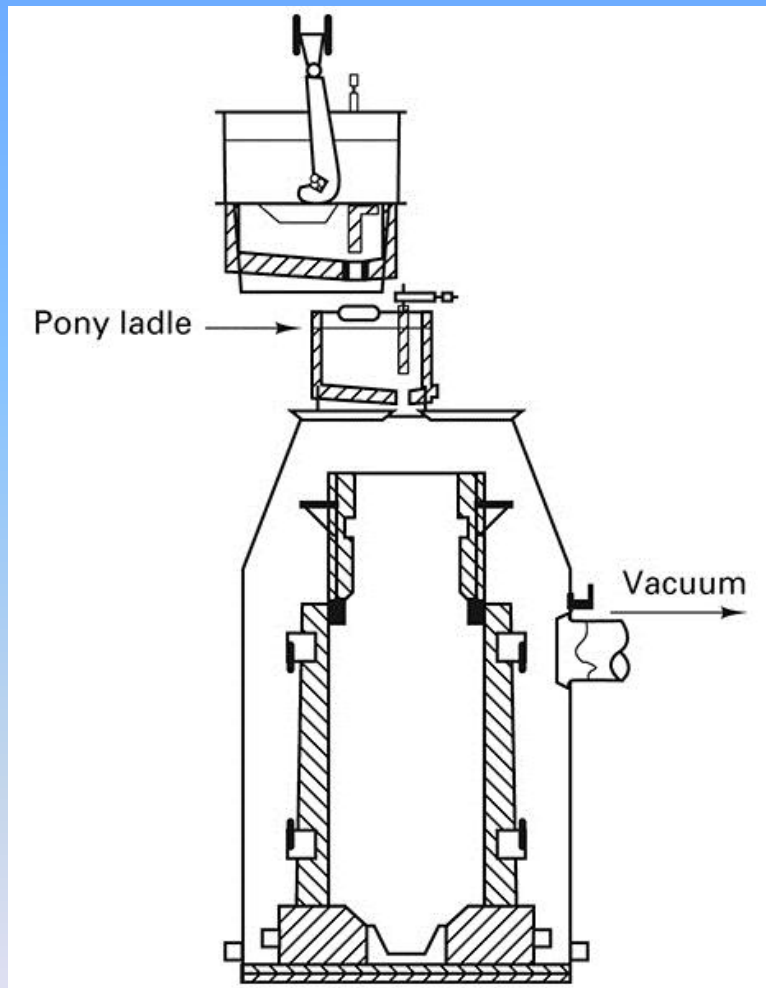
Method of degassing steel by pouring through a vacuum.
